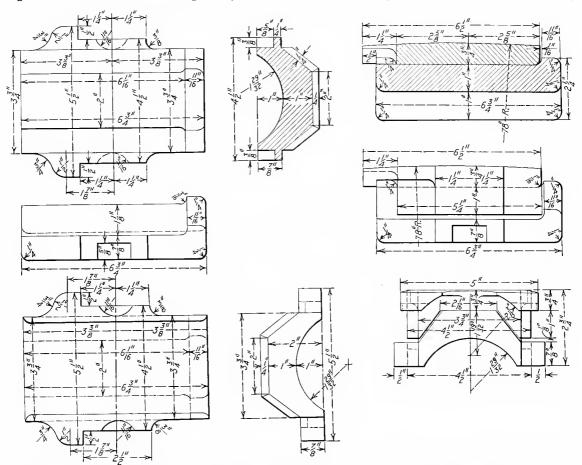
M. C. B. Standard Bearing and Wedge for 334 in. by 7 in. Journal. (M. C. B. Sheet 3.)
